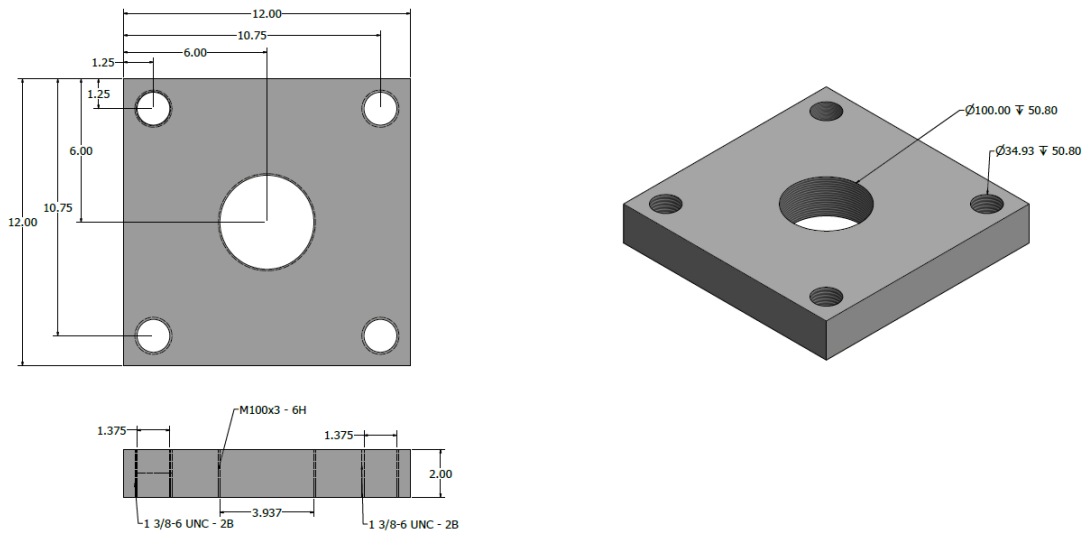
(a): Load Cell – Pipe Specimen Connecting-Plate
